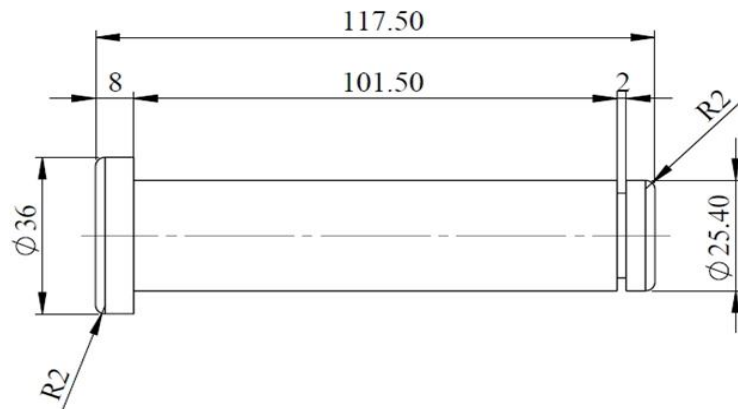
Dimensions of steel hinge (2) in millimeter scale.
